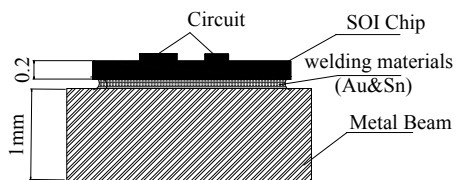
Schematic of welding SOI chip with metal body.
